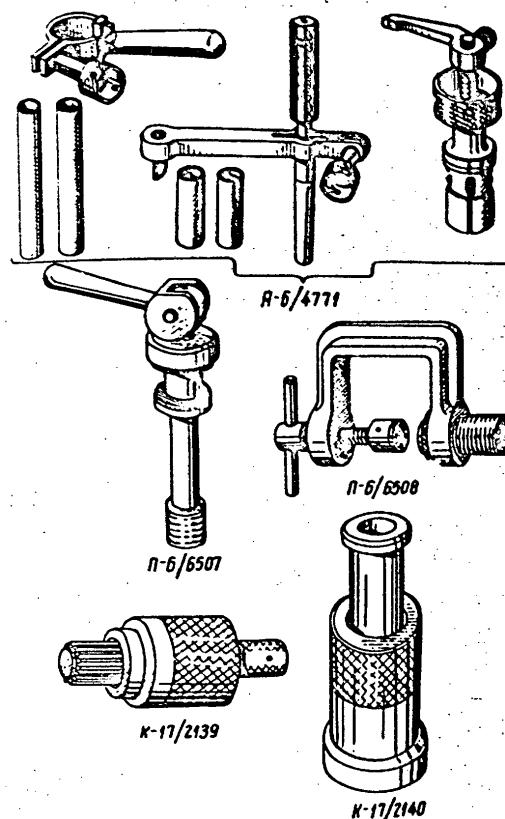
APPLIANCES FOR ASSEMBLY OF IBI-621 PUMP DRIV.
